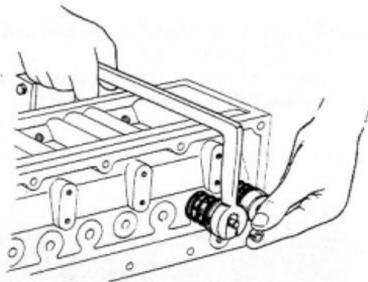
Removing Valve X4929 Spring Retainer Locks
